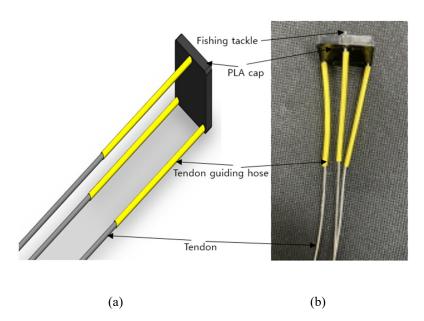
Design and fabrication the of Variable stiffness mechanical structure. (a) Mechanical structure CAD design and (b) fabricated mechanical structure
